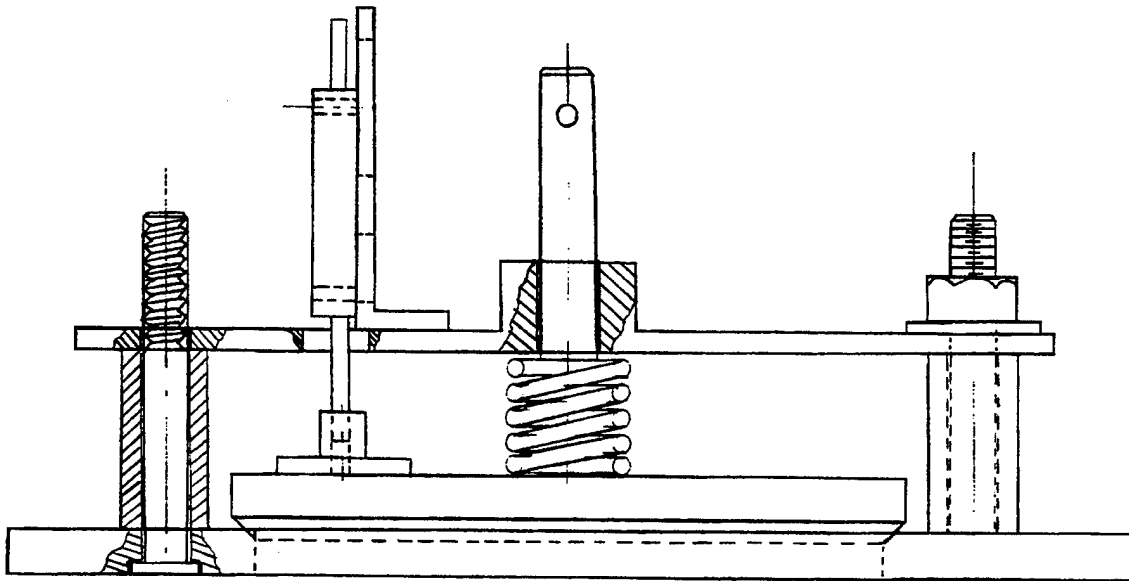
Sketch of the Single Compression Spring Check Valve Design
